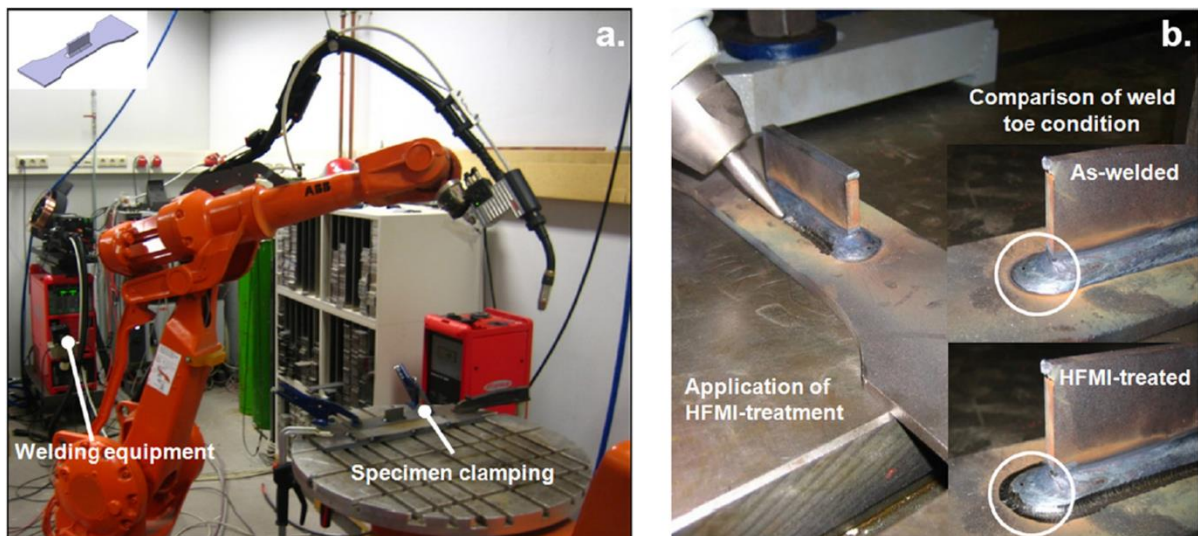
(a) automated welding process. (b) HFMI treatment [66].
